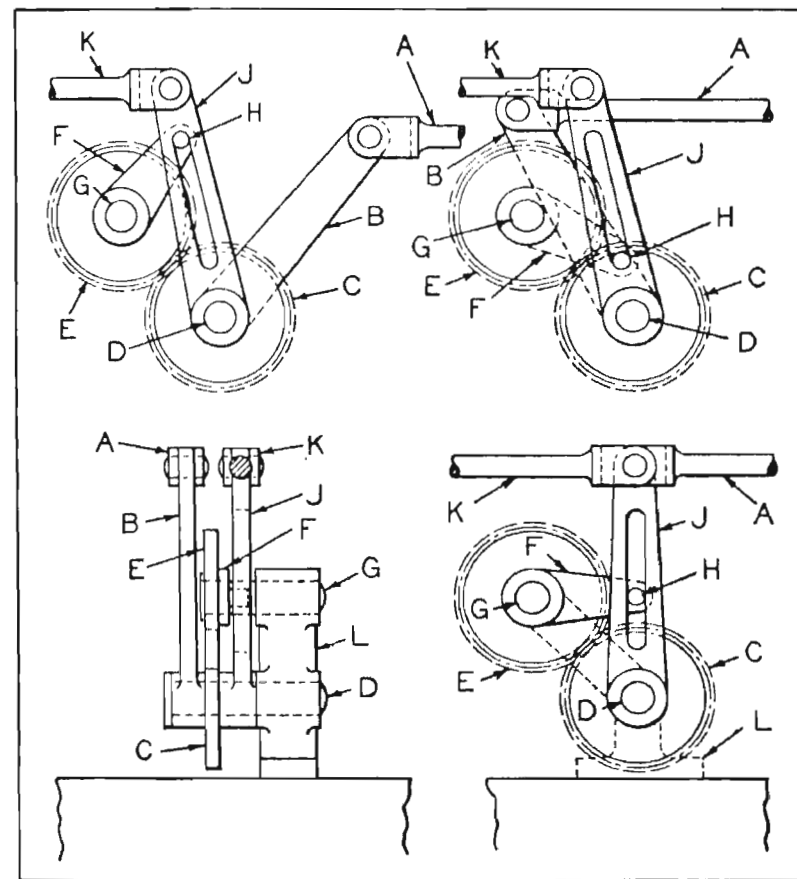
Diagrams Illustrating Operation of Reciprocating Mechanism
